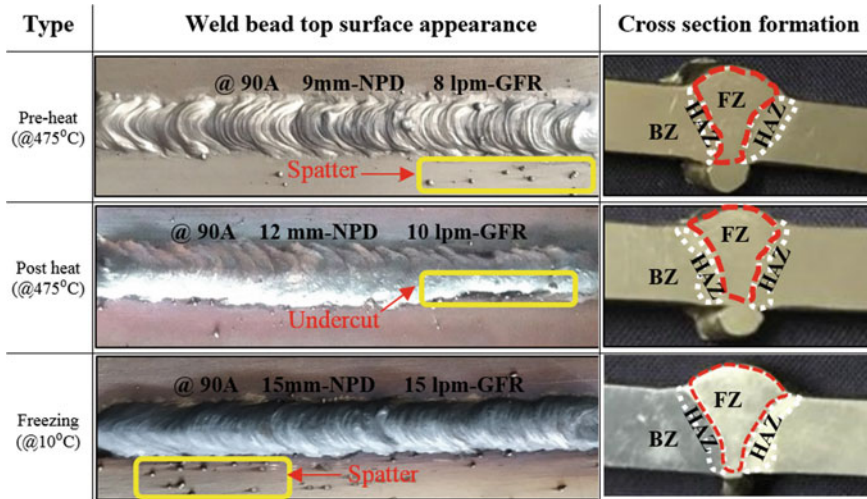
Top surface weld bead appearances and cross-sections of weld joints
